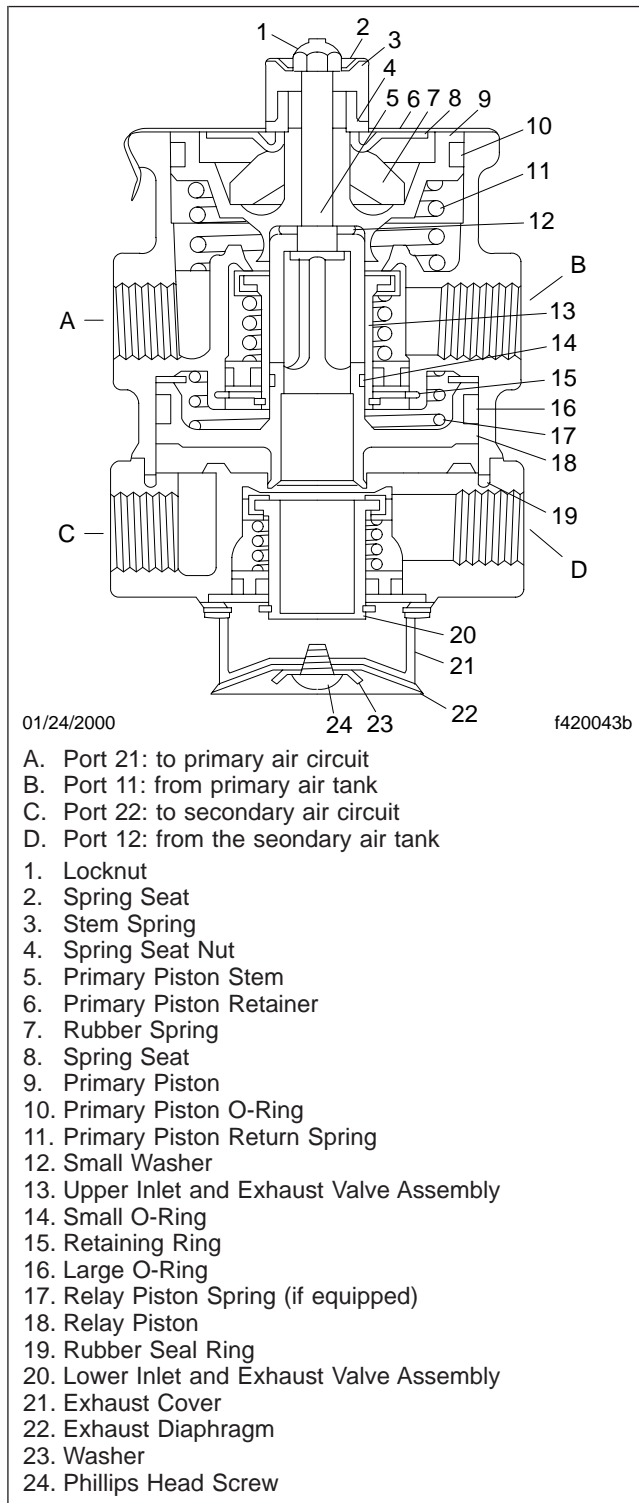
, Bendix E-6 Dual Circuit Foot Valve (sectional view)
